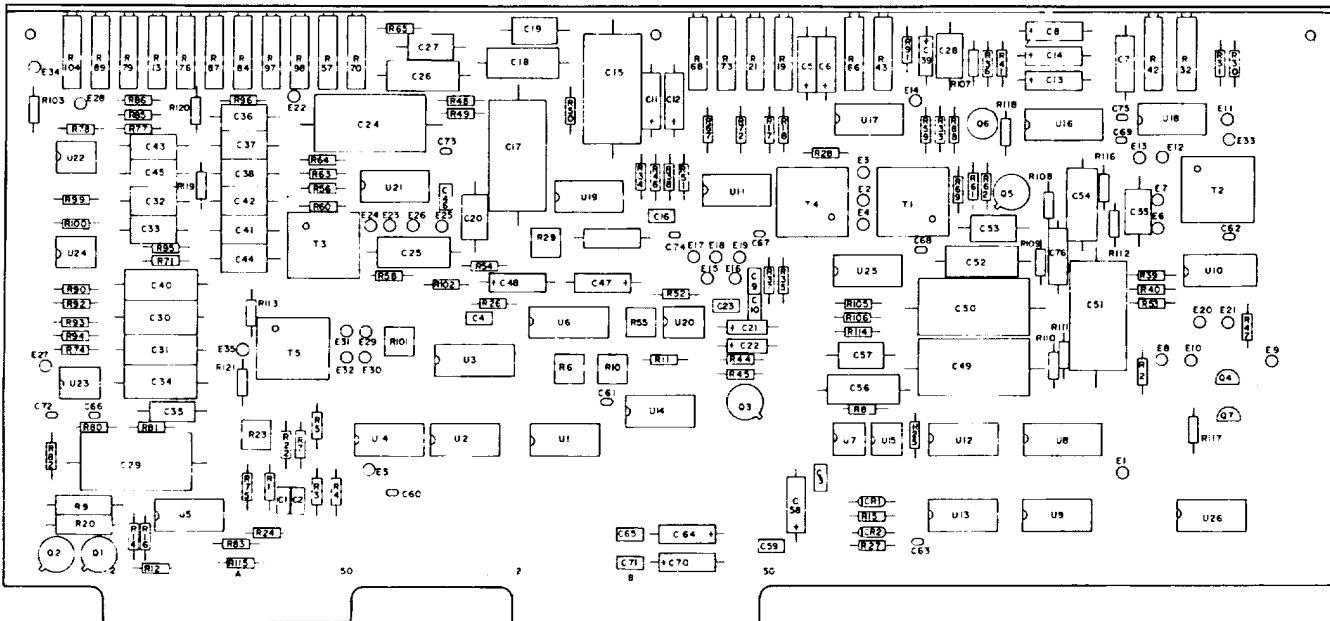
Operations Voice Buffer Circuit Card Assembly, 4A2 Parts Location Diagram
